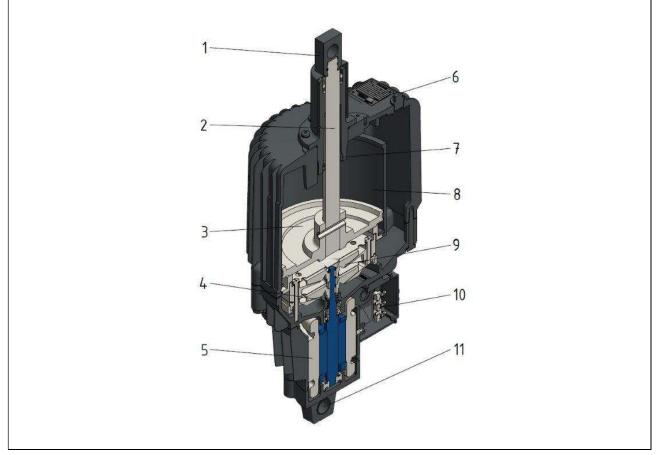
ELDRO[®] thruster layout (example: Ed 630/9)
